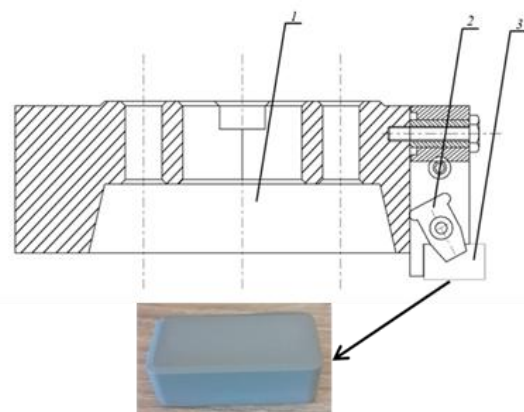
Single-edged milling cutter. 1-body, 2-clamp, 3 mineral-ceramic insert
